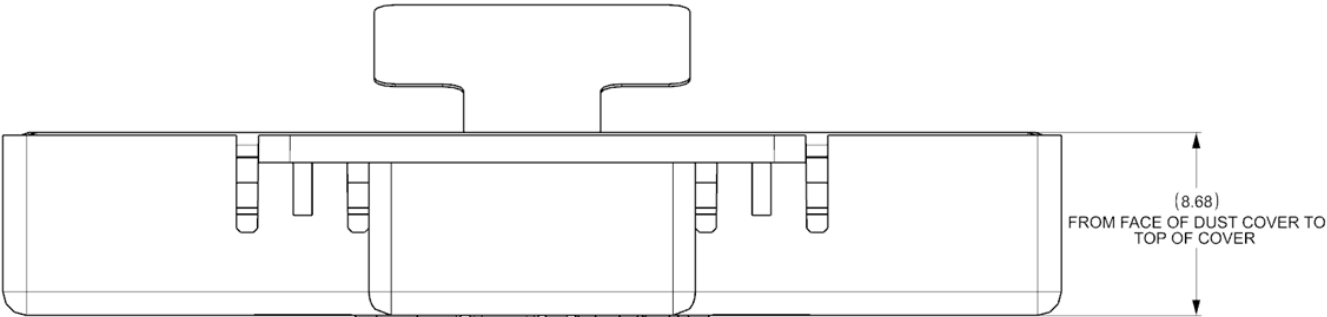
124-Pin Top View of Free-Side Connector with Dust Cover Attached
